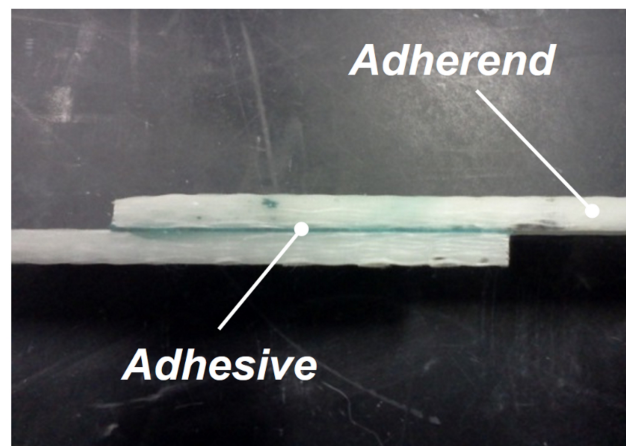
Side view of the manufactured GFRP lap-joint.
